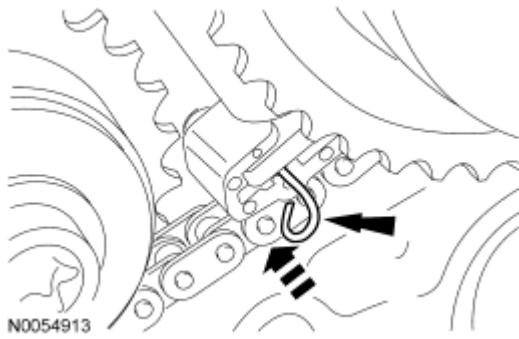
Compressing RH Secondary Timing Chain Tensioner & Installing Suitable Lock Pin To Retain Tensioner In Collapsed Position
